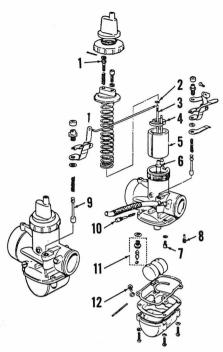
Exploded view of carburetor used on 500 Suzuki.
